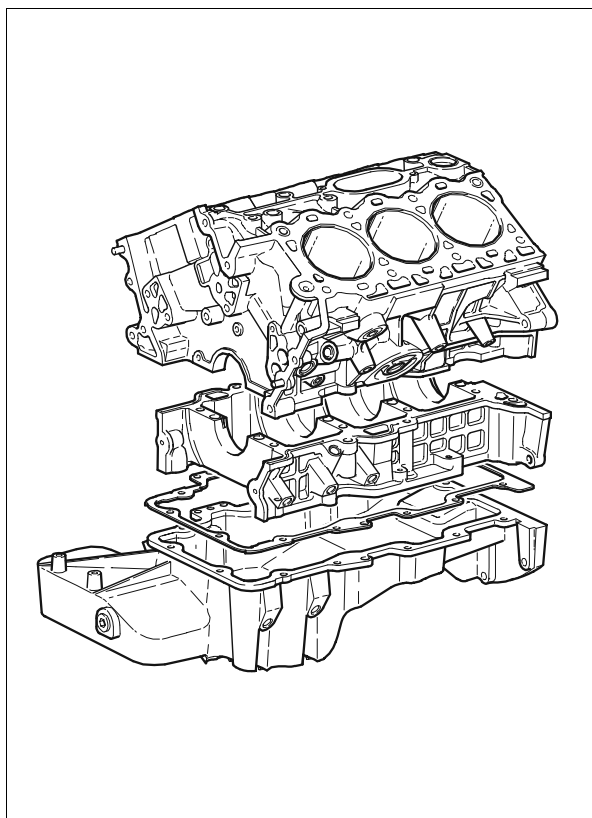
ENGINE STRUCTURE (AJ60 shown)
